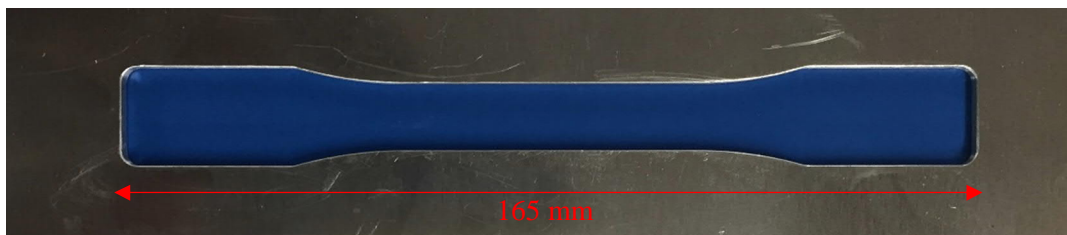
Aluminium mould for casting epoxy according to ASTM D 638 (2014)
